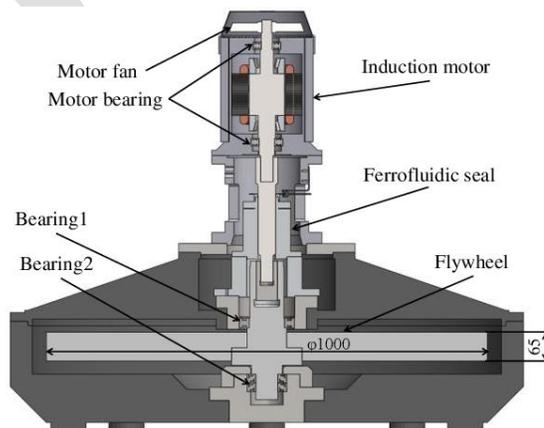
Configuration of a flywheel system that employs an induction motor and ball bearings
